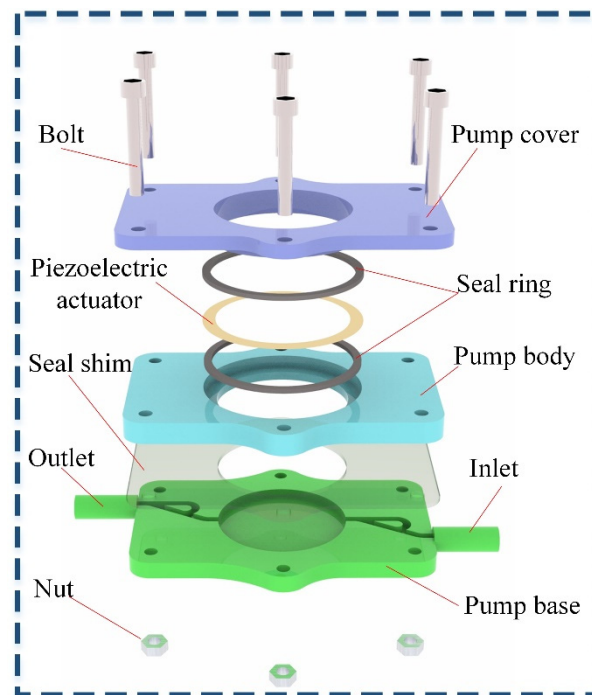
Structure of the valveless piezoelectric pump with Tesla valve assembly.
